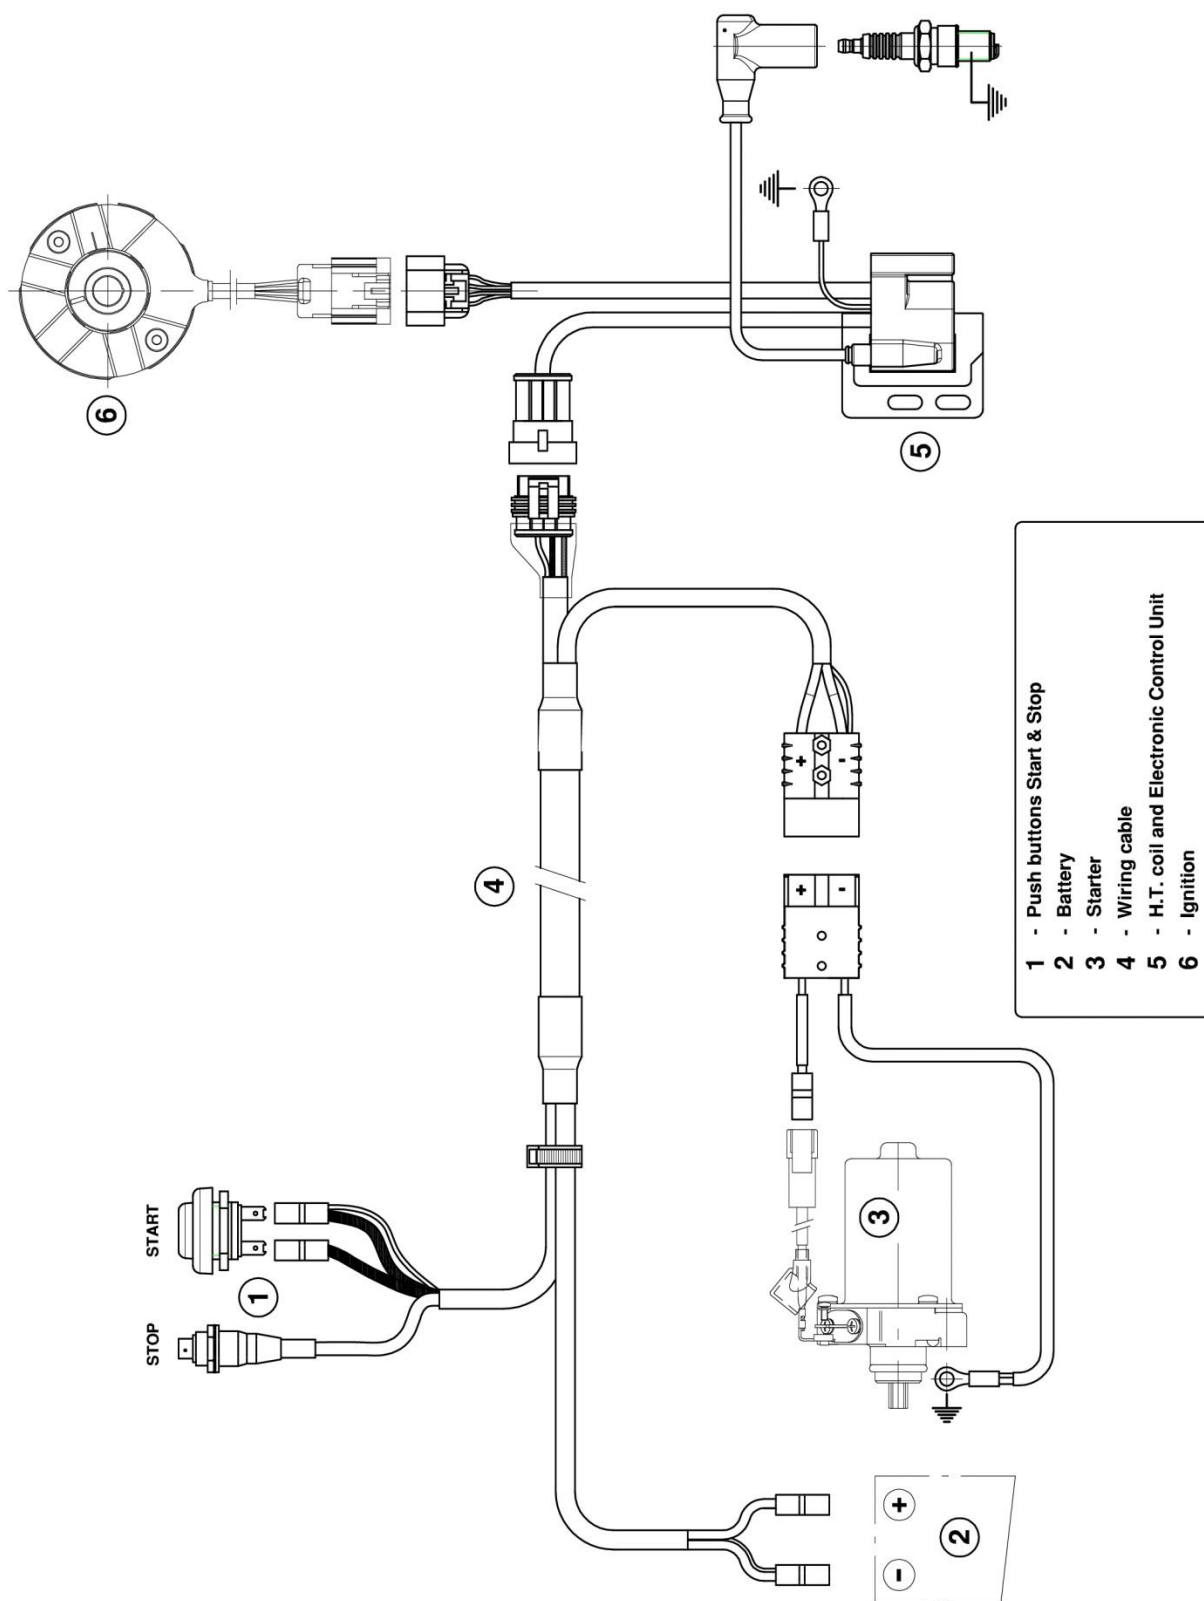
PHOTO COMPLETE ALTERNATIVE WIRING LOOM
